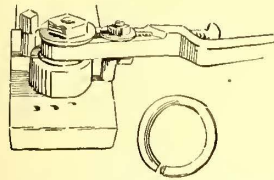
BENDING TOOL FOR RINGS AND LINKS.
